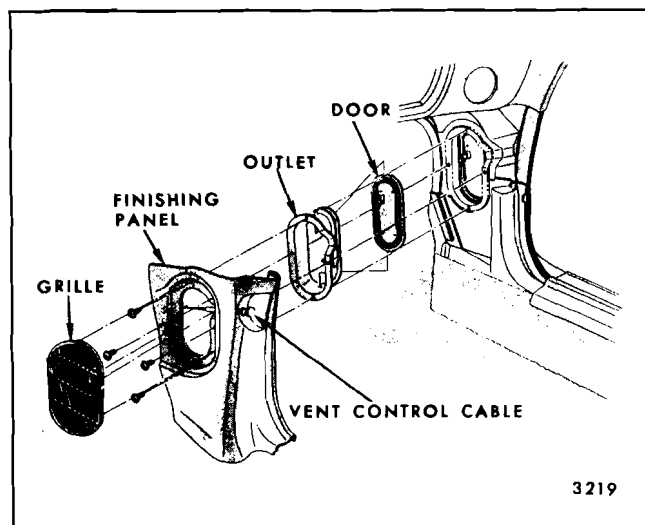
Shroud Side Finishing Panel and Air Duct Outlet - "Z-67" Style
